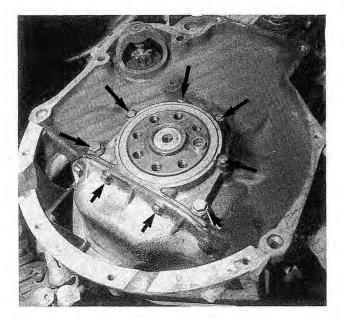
Rear crankshaft oil seal carrier mounting bolts (arrows). Transmission, clutch assembly, and flywheel removed from engine.
